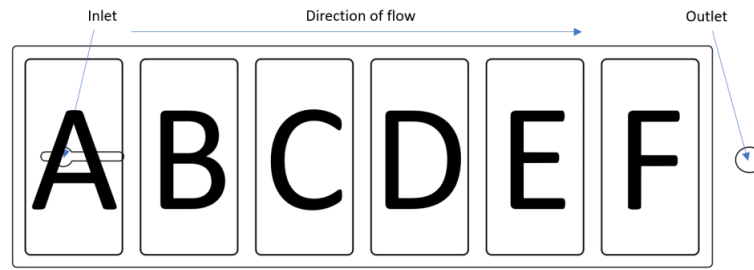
Mould cavity highlighting inlet, direction of flow, outlet and specimen declaration
